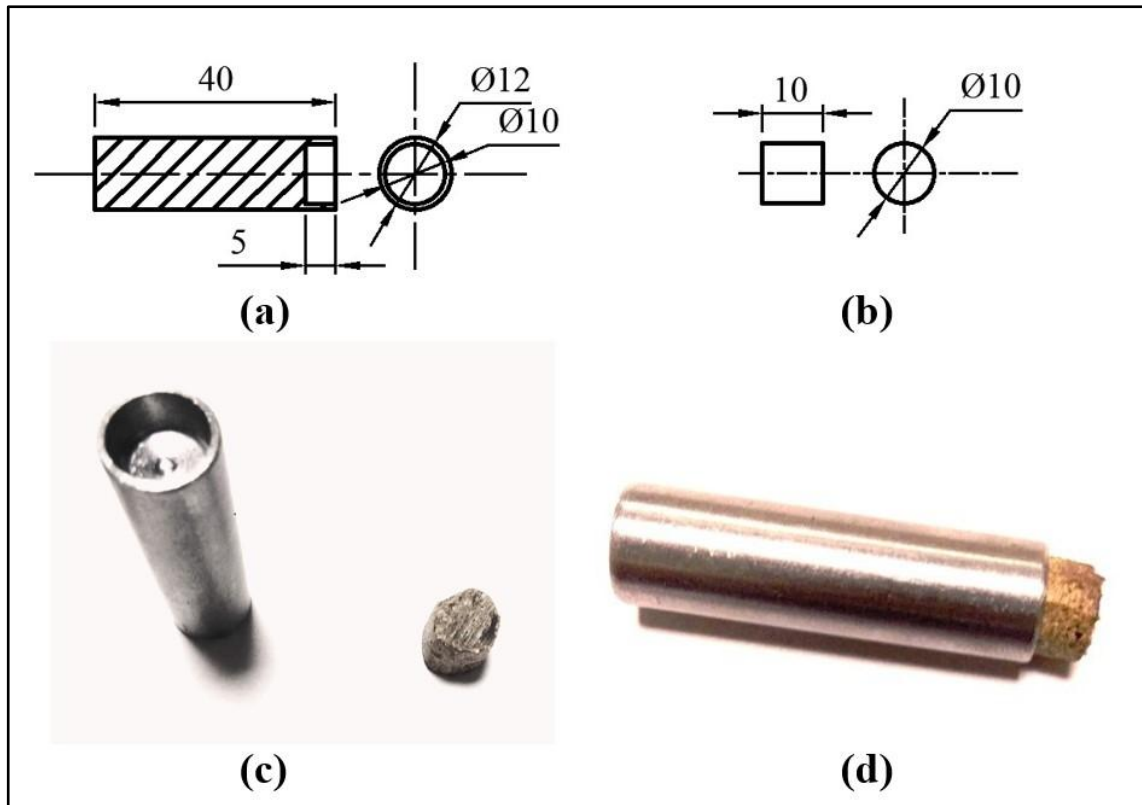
Pin assembly details: (a) pin holder drawing, (b) pin drawing, (c) pin holder and pin specimen, (d) pin assembly
